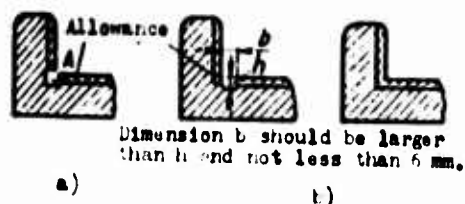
Construction of a cast part: a) with groove A, is not recommended; b) recommended construction shapings.
